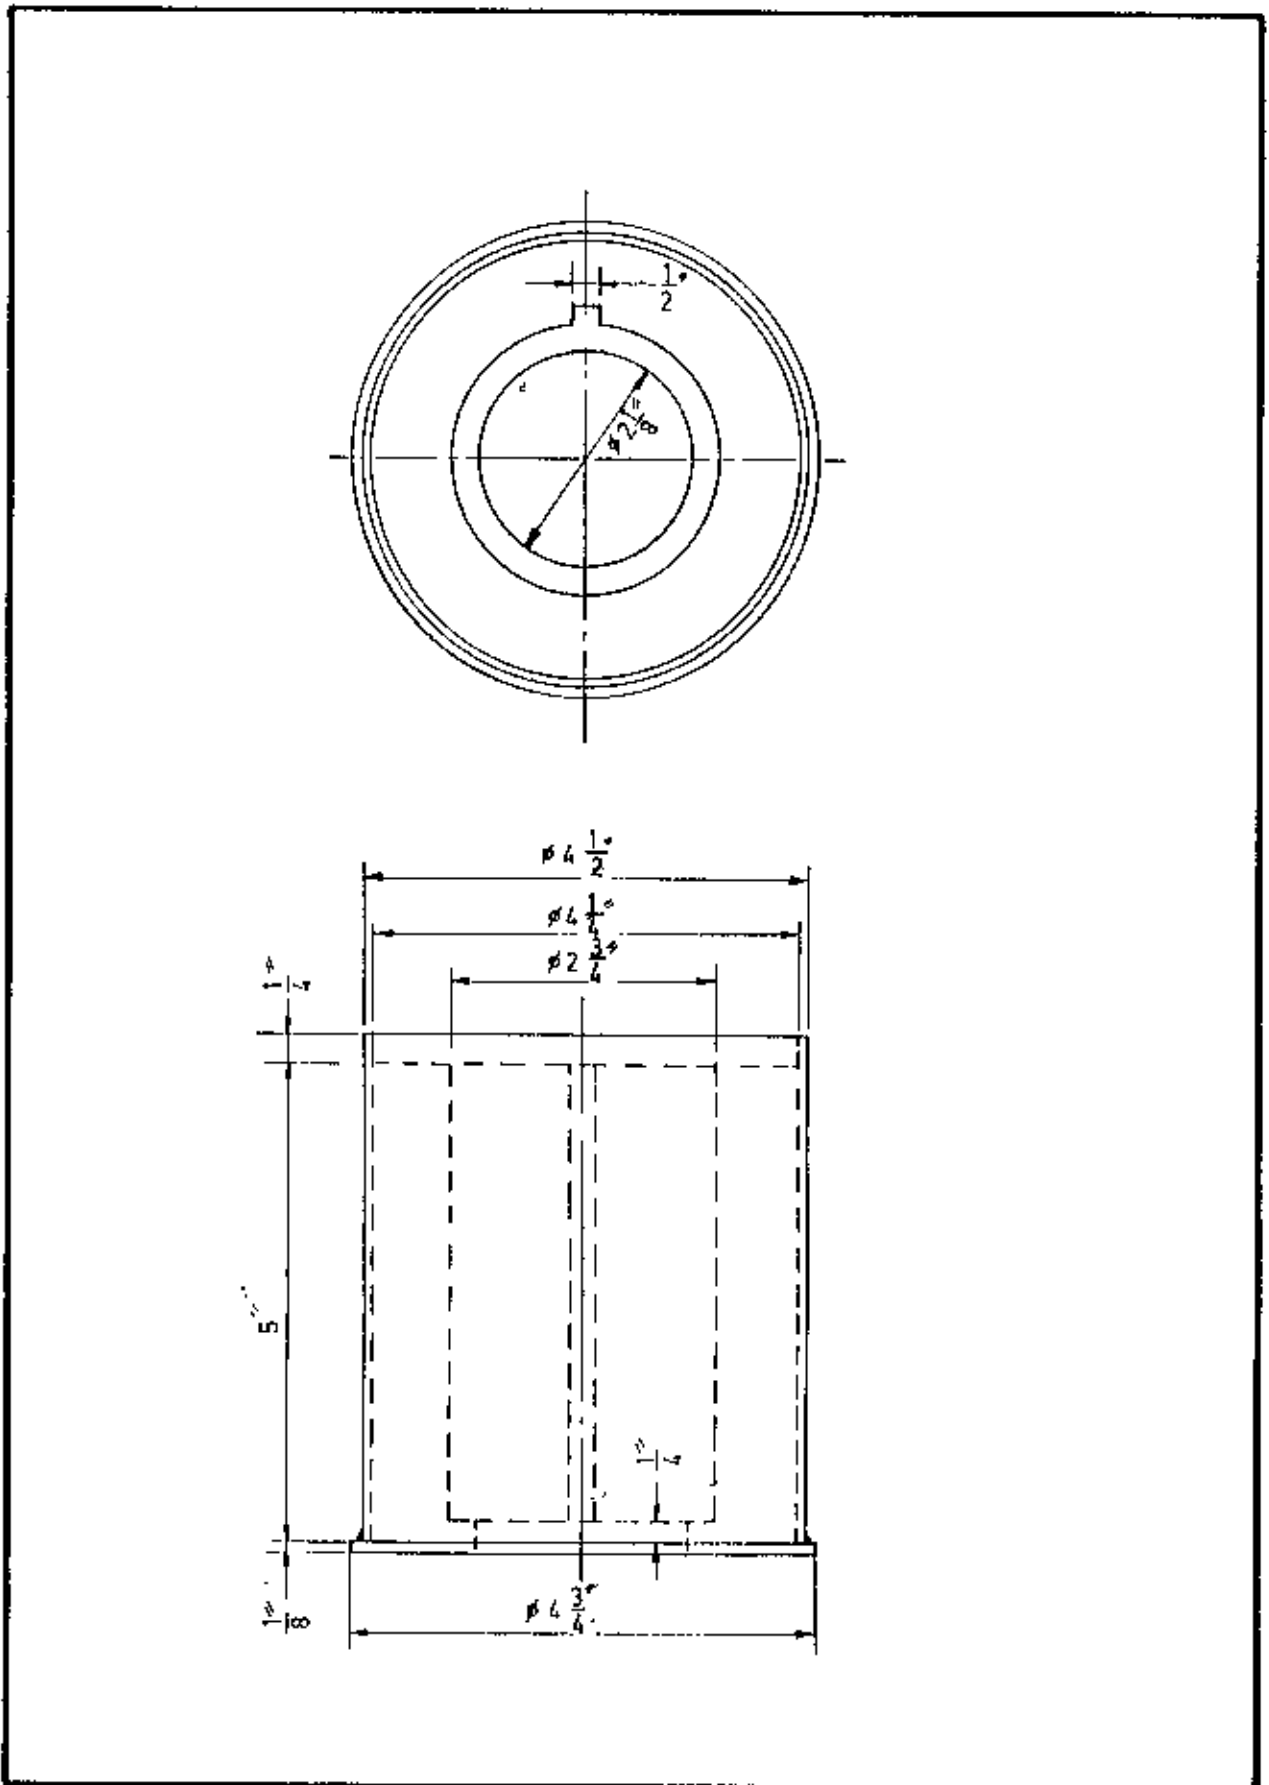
B : OUTER REFRACTORY WALL WITH STEEL SHELL OF FURNACE
